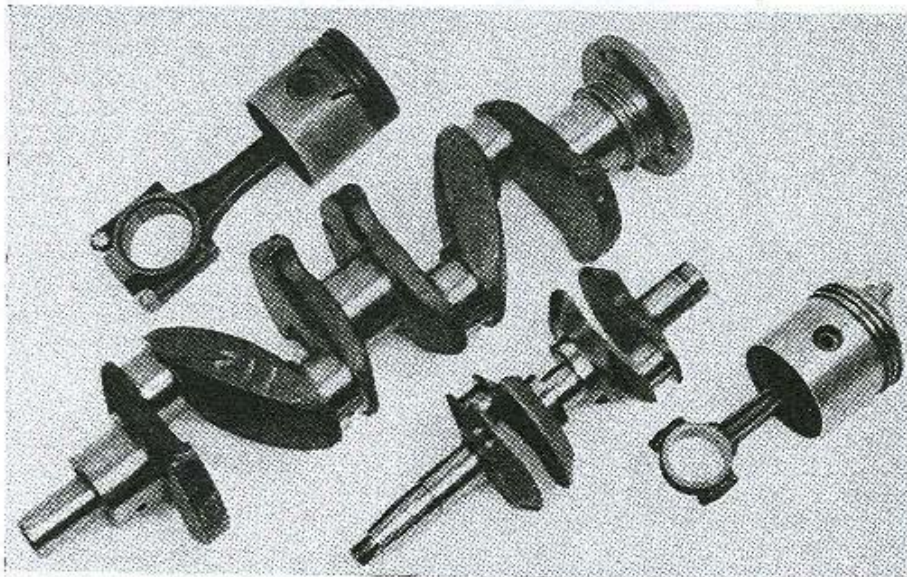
Comparison of outboard motor and automotive crankshafts, both rated at 20 hp per cylinder
